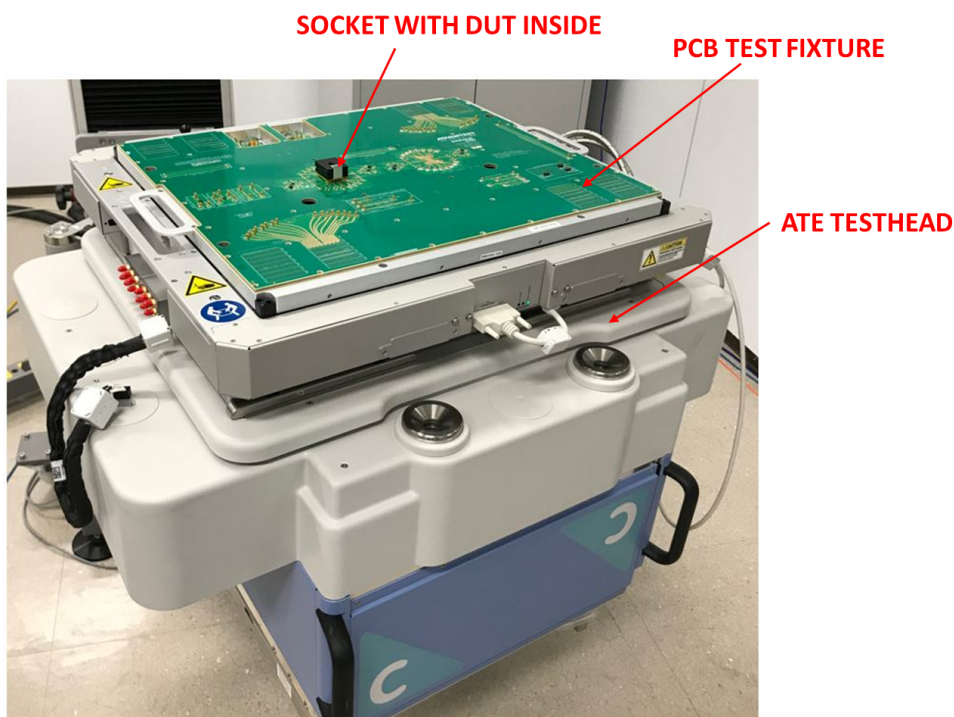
Advantest V93000 ATE system with a DUT test fixture IC socket based testing application.
